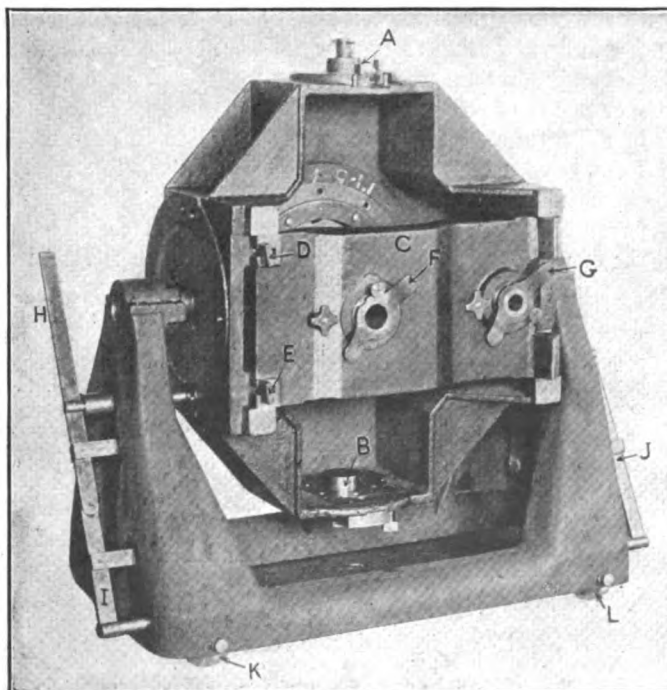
INDEXING JIG FOR VARIOUS OPERATIONS ON REAR-AXLE HOUSINGS
